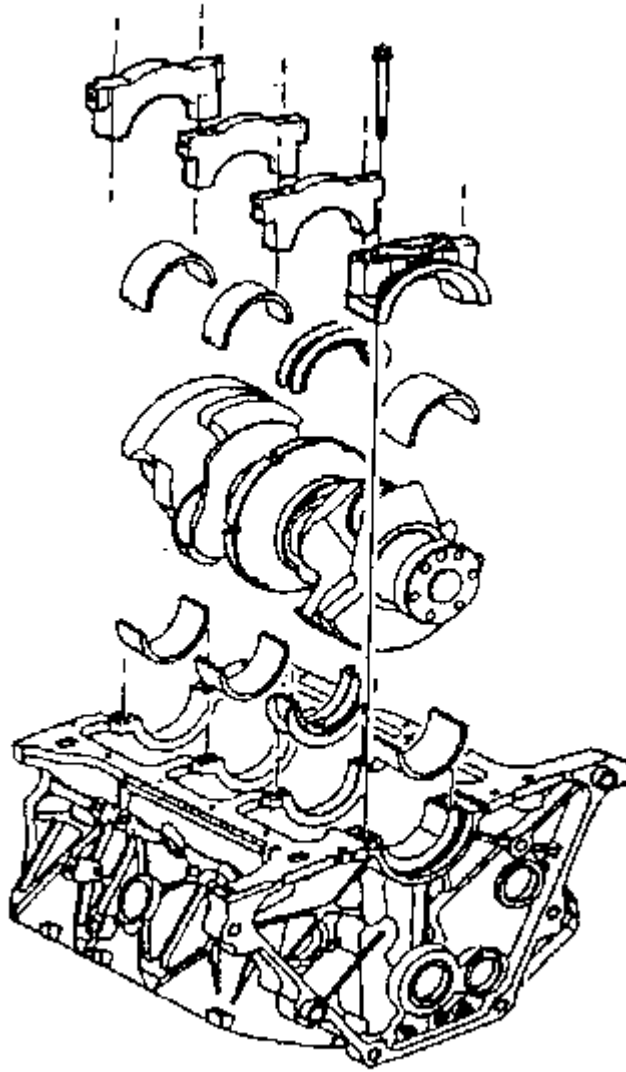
View Of Crankshaft, Main Bearings And Bearing Caps
